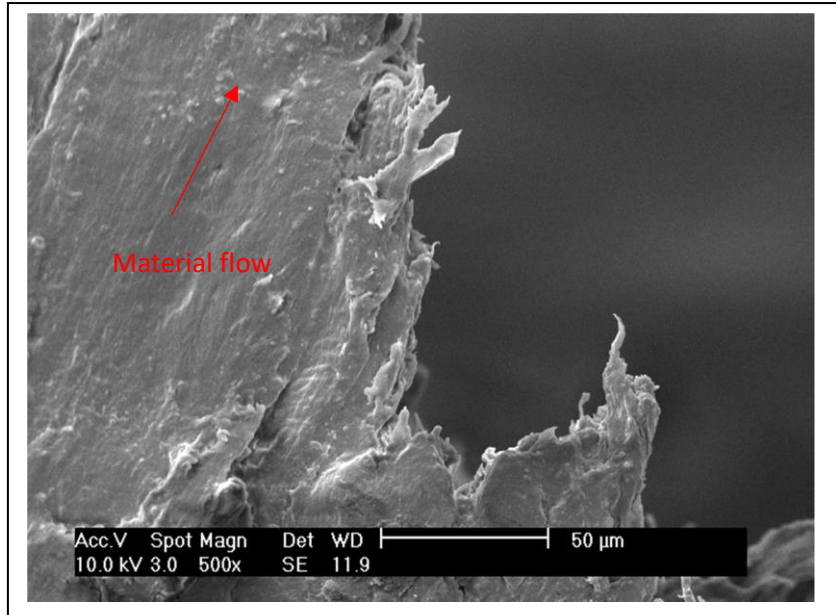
Tooth surface with material flares attached for 22°C gear.
